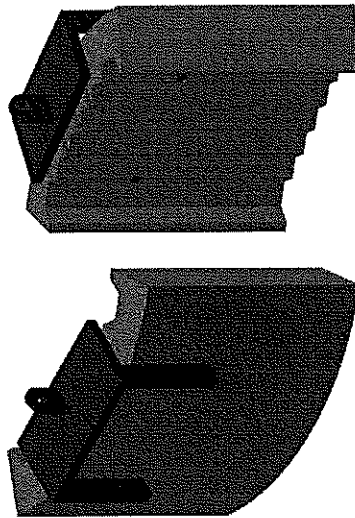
RENDER OF THE LIFTING JIG SUPPORTING A CORE REFLECTOR BLOCK FROM THE OUTER FACE.
